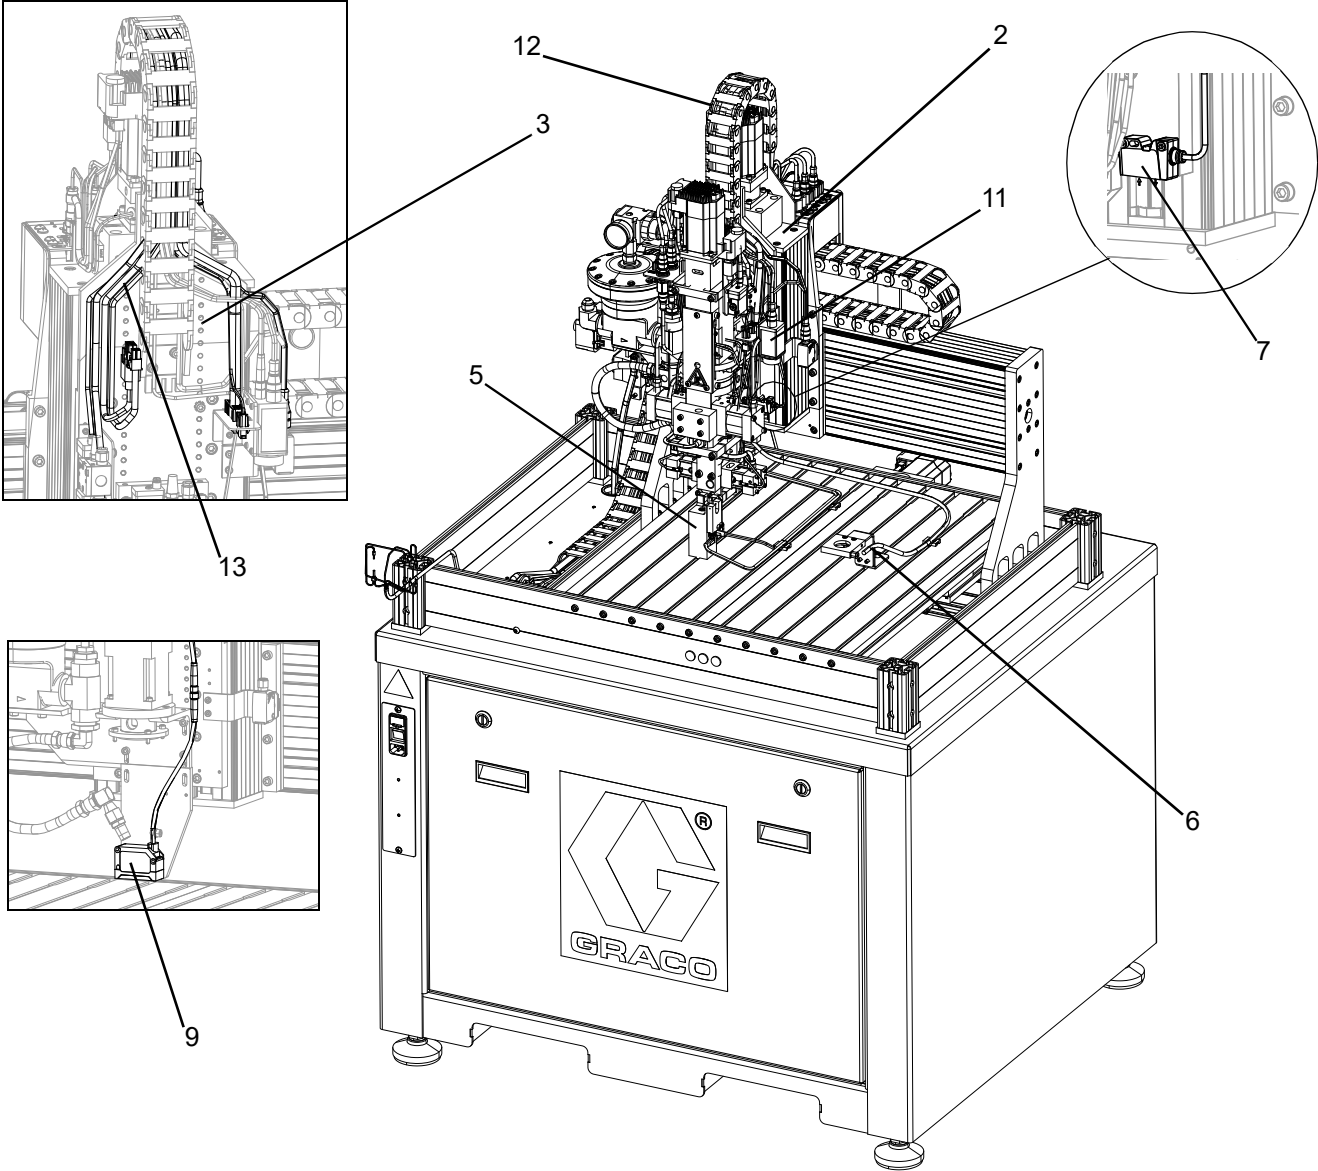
C-300 and C-500 System Parts 2 (with Cover Removed)
